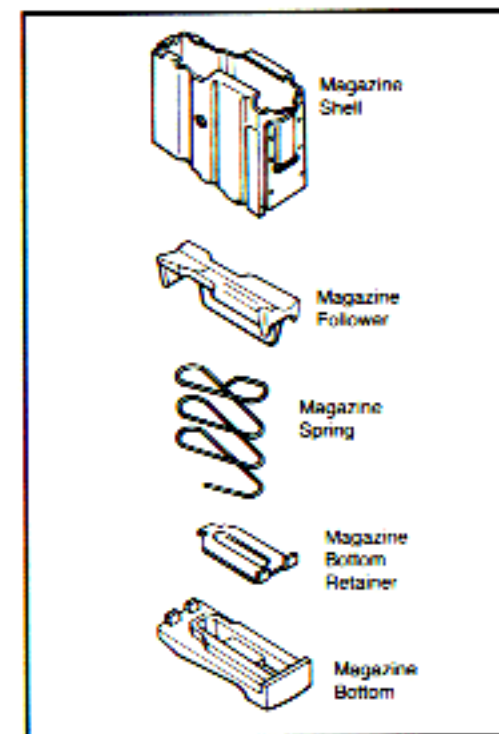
Exploded view of the Mini-14 magazine components. This illustration is included to show the relationship and names of the magazine components.
